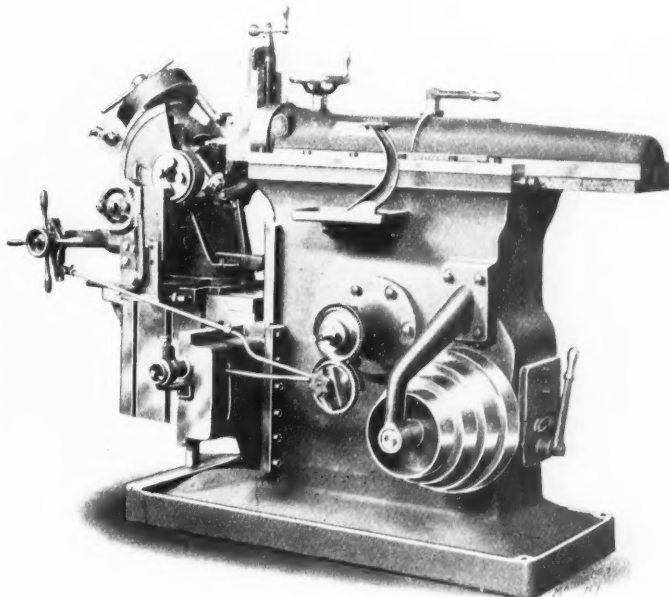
An American Shaper Attachment employing a Templet for Controlling the Shape of the Bevel Gear Tooth produced.
